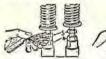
(left). Adjusting valve-stem clearance between end of valve-stem and tappet with a thickness gauge.
